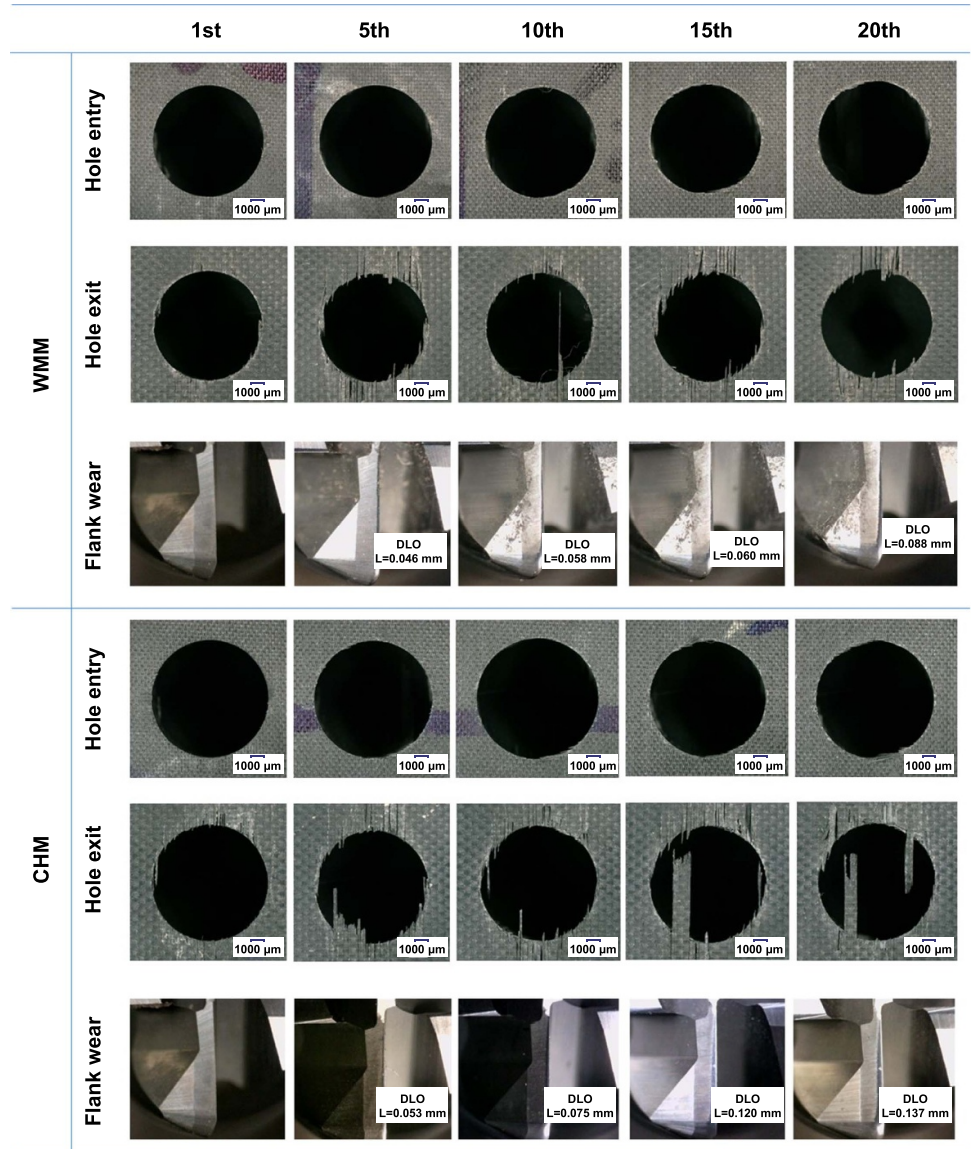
Wear land size of front cutting edges of end mill for various holes in both WMM and CHM.
